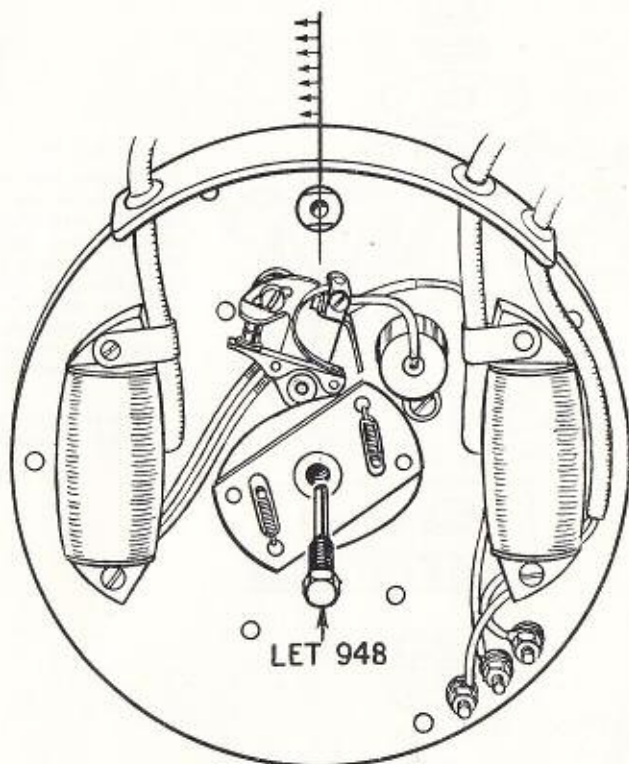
Resetting Miller Flywheel. Dowel hole in flywheel is shown set central in relation to hole in Stator Plate at top dead centre. The Timing Unit is shown in full retard position. Note also Extractor Bolt Service Tool No. LET 948 for withdrawing timing unit.
